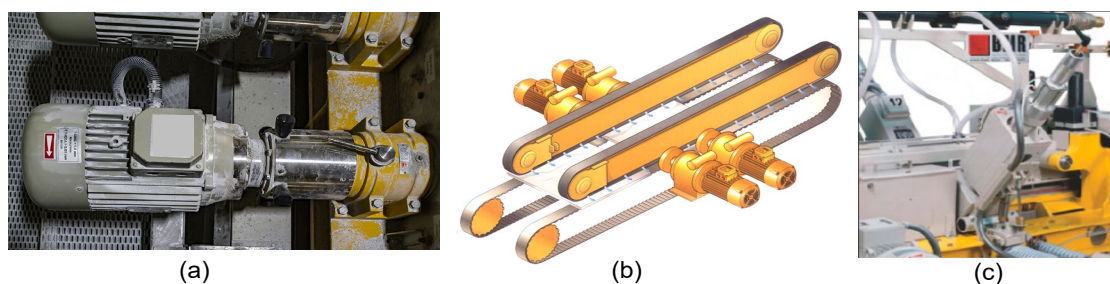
(a) Electric cutting motor and mechanism to regulate the distance [8]. (b) Belt system for dragging the tiles. (c) Finishing wheels for chamfering.
